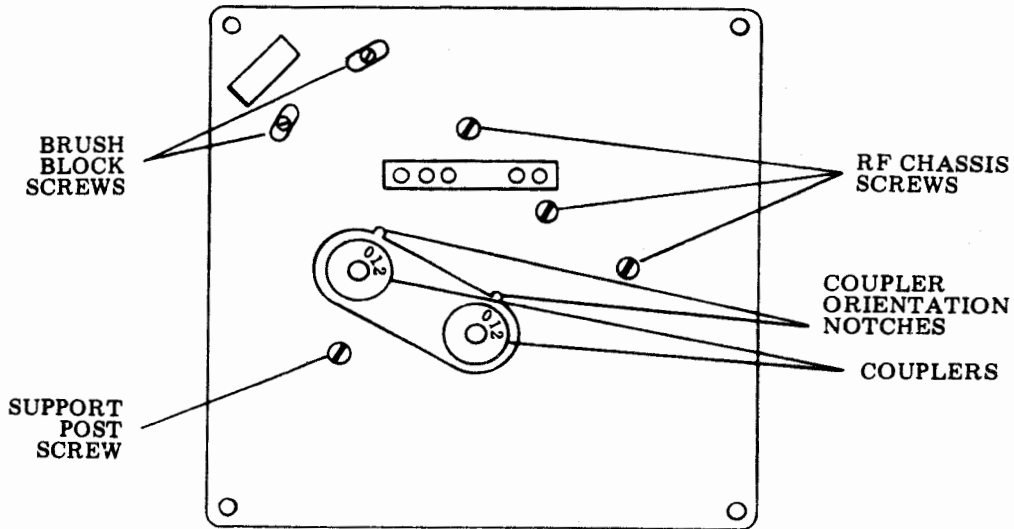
RF Amplifier Assembly A2A4, Bottom View, Disassembly Screw Locations
